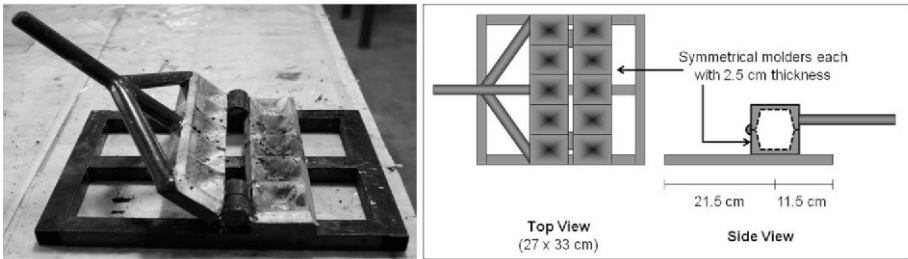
Household briquette molder used for briquette production, showing from left to right: the pictorial view of the machine and the schematic drawing showing its dimensions
